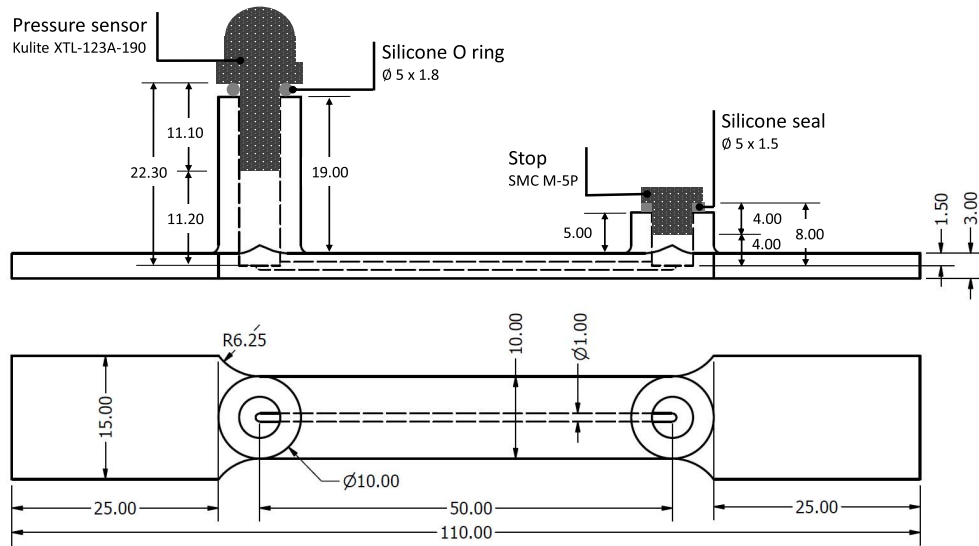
Dimensions of the metal additive manufactured tensile test specimen (in mm).
